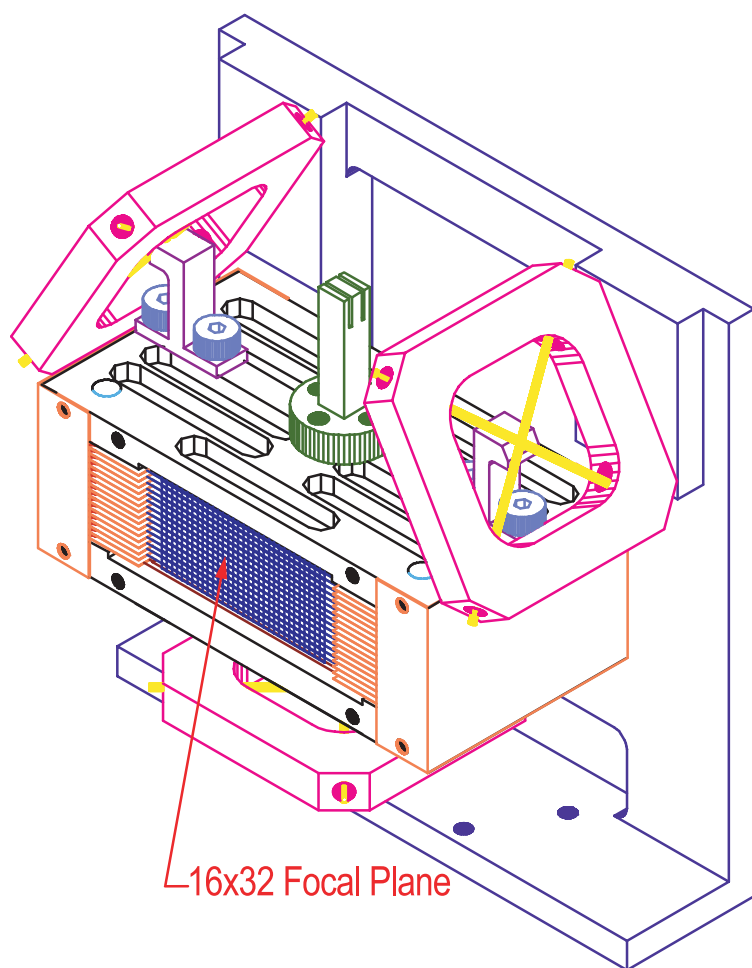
Completed detector array package, including mechanical and thermal attachments but with the electrical connectors not shown. The cold detector package is mounted by a mechanically stiff yet thermally isolating support, using a kinematic Kevlar suspension. The stub in the center of the detector package is the thermal attachment point.
